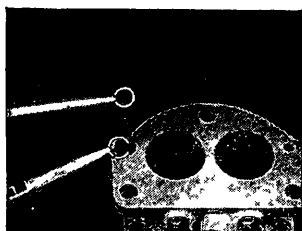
Remove switch strainer retaining ring and strainer. Remove all parts from bowl cover and form air horn and piston housing using
